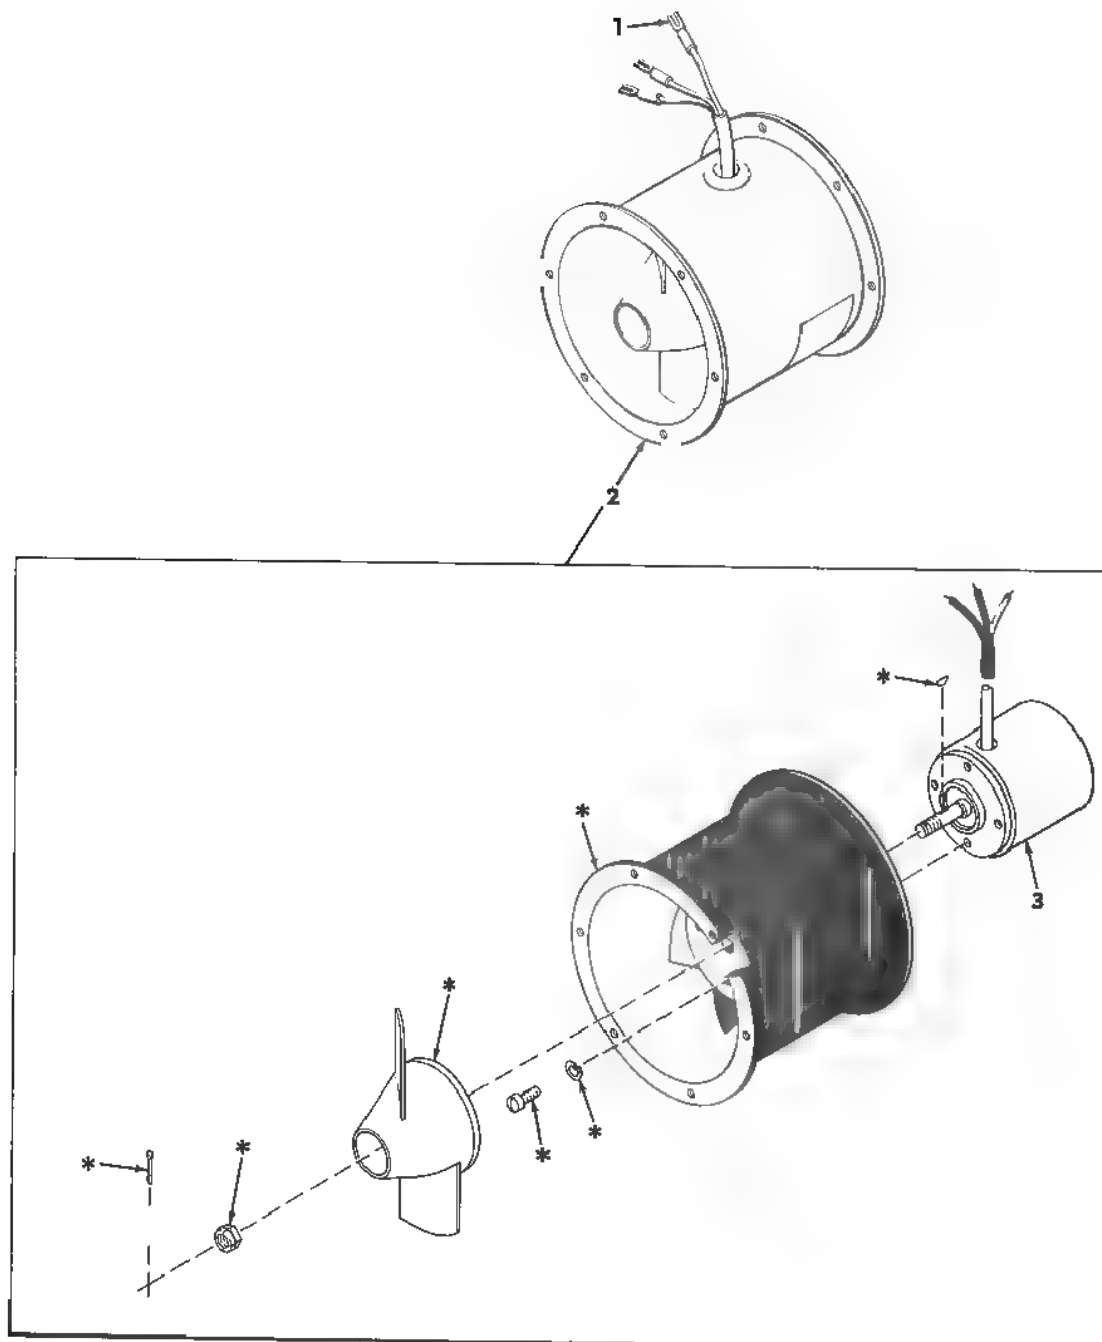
COVER /8000577/-EXPLODED VIEW
